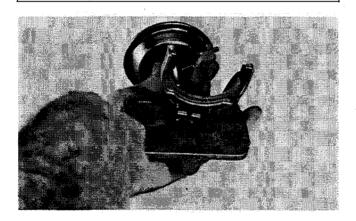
1021.9 Slide shift fork towards motor. Remove snap ring with screw driver or similar tool.
